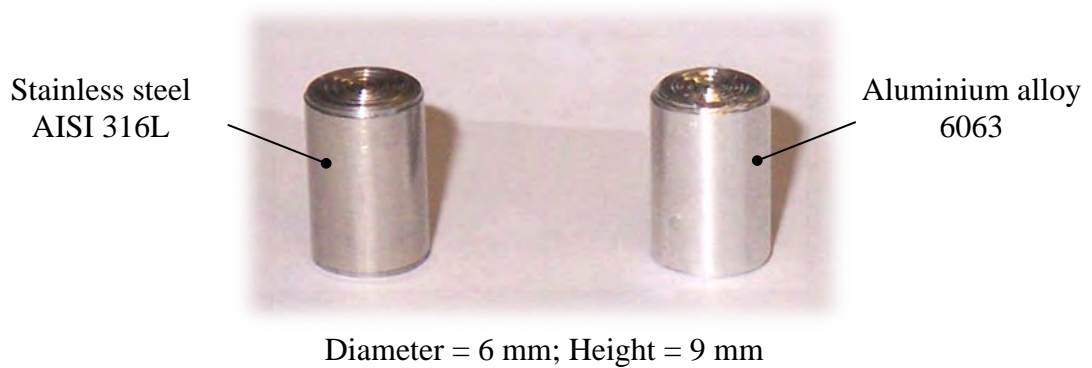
The specimen fabricated for the uniaxial compression test.
